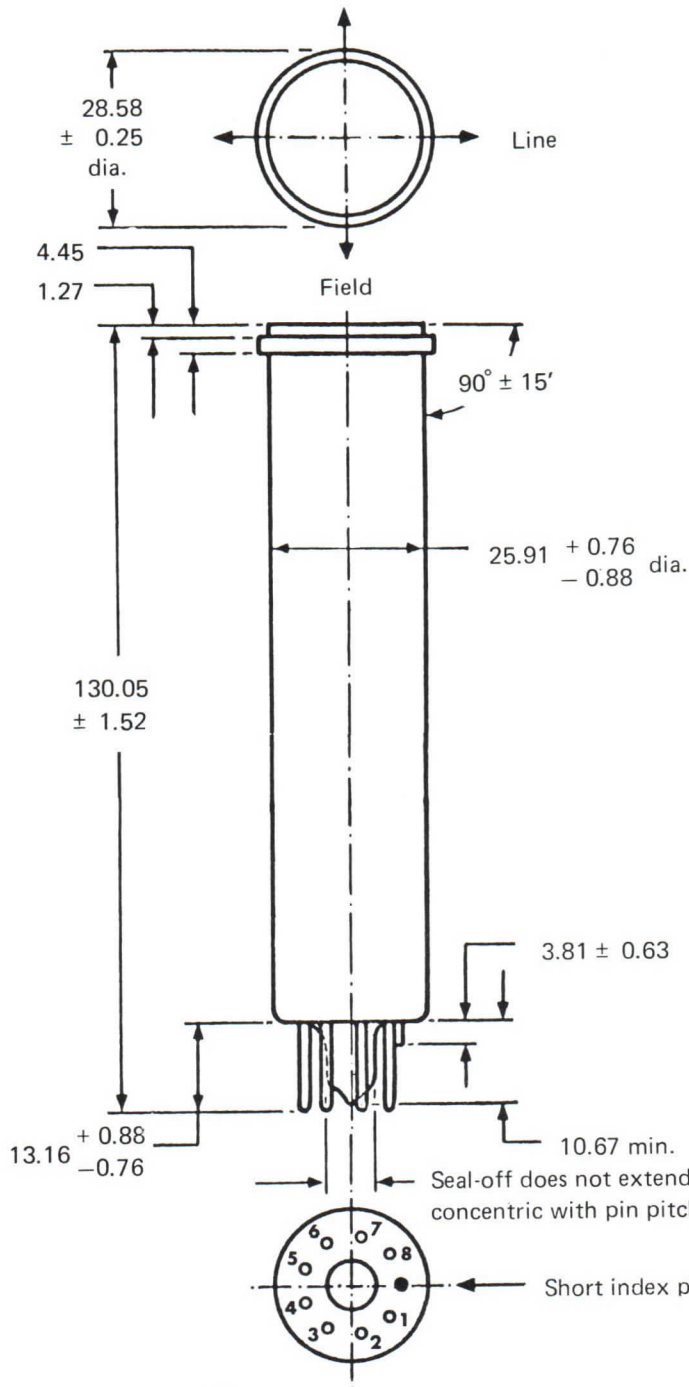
DIMENSIONAL OUTLINE DRAWING
